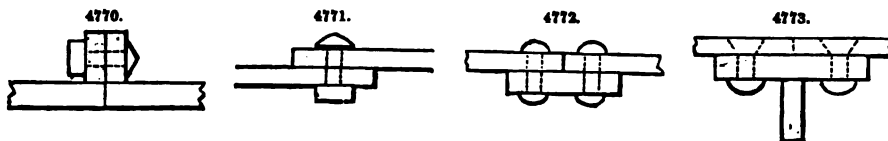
, with rivets, is a common mode of uniting plates of marine boilers, and other works required to be flush externally.
